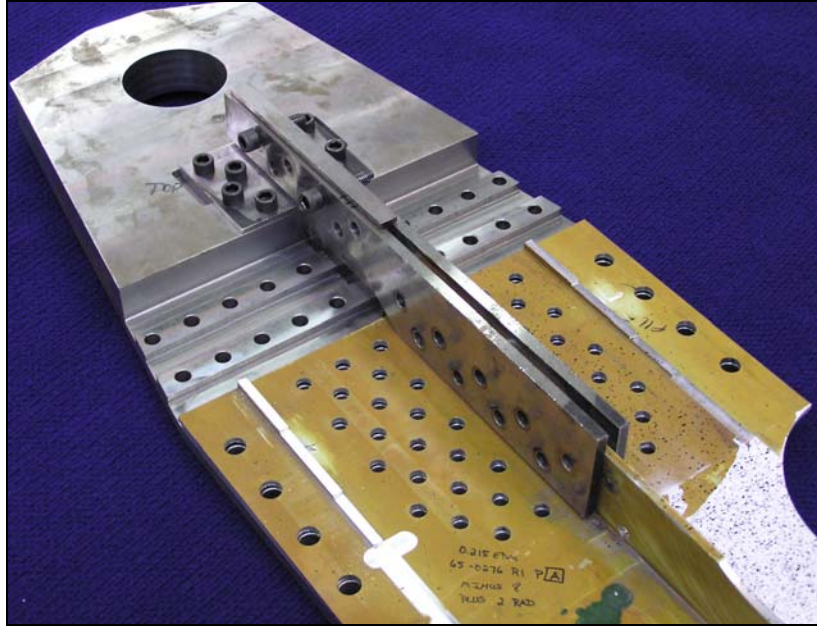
Riser Side (left) and Skin Side (right) Lower Grip Assembly.
